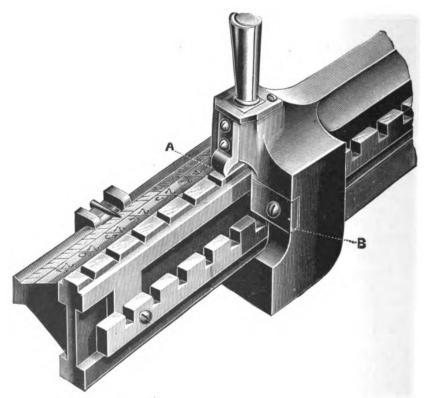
AVERY'S PATENT STEEL NOTCHED PROTECTION BAR.
